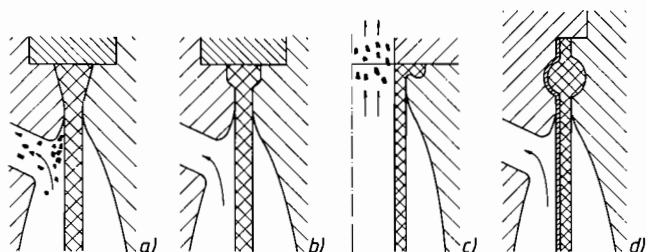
Elastomer Diaphragms and Hoses. a) clamping zone conical, b) clamping zone groove profile, c) clamping of an elastomer hose, d) O-seal shaped diaphragm (coated).
